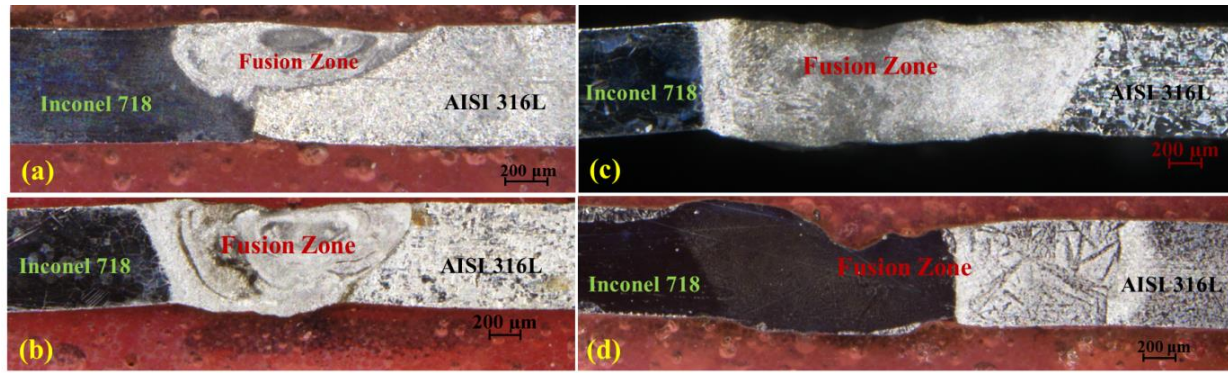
Cross-sectional view of (a) PD0 (b) PD1 (c) PD5 and (d) PD6 dissimilar welded joint
